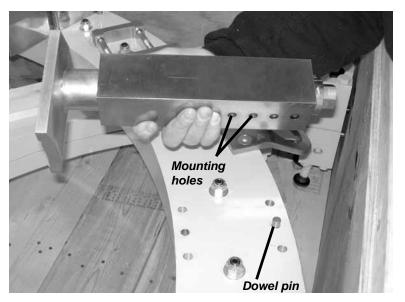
Align one of the mounting holes in the leg with the dowel pin on the HDSF rotating ring. Make sure all legs are mounted in the same hole.
